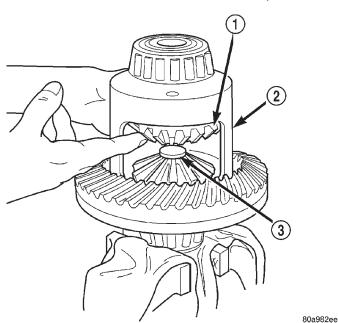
Upper Side Gear & Clutch Disc Pack Installation
